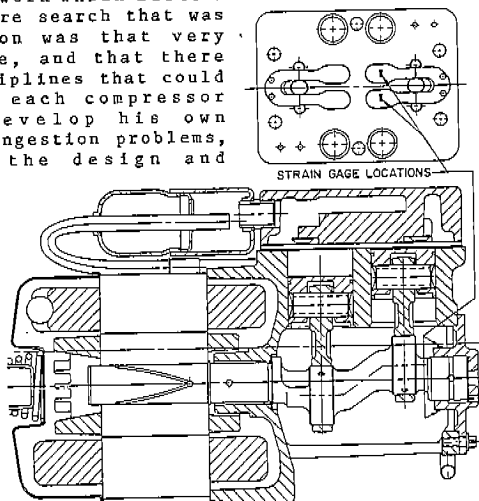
COMPRESSORS STRAIN GAGED TO DETERMINE CYLINDER PRESSURES DURING LIQUID SLUGGING.
